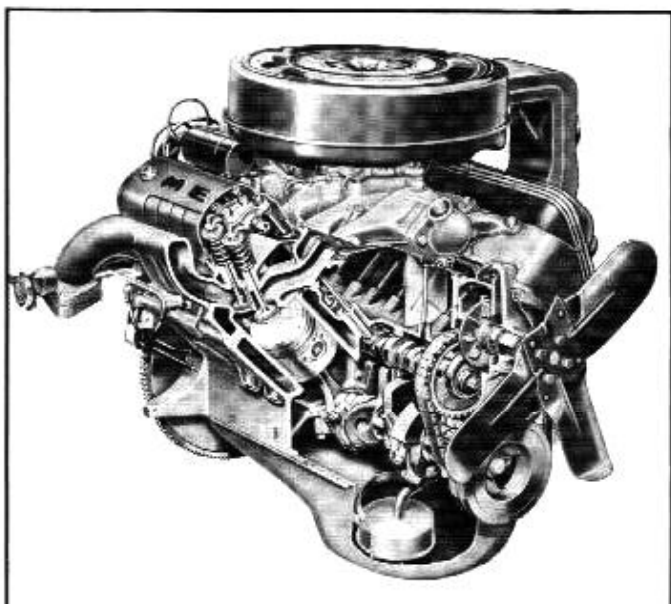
A-3—Right Front 3/4 Section—312 Cubic Inch Engine
